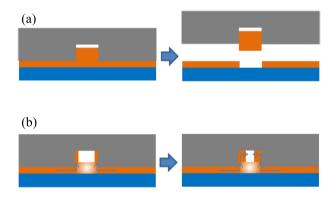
Diagram of typical defects that occur during imprinting: a) sticking to the mold; b) insufficient filling into cavity.
